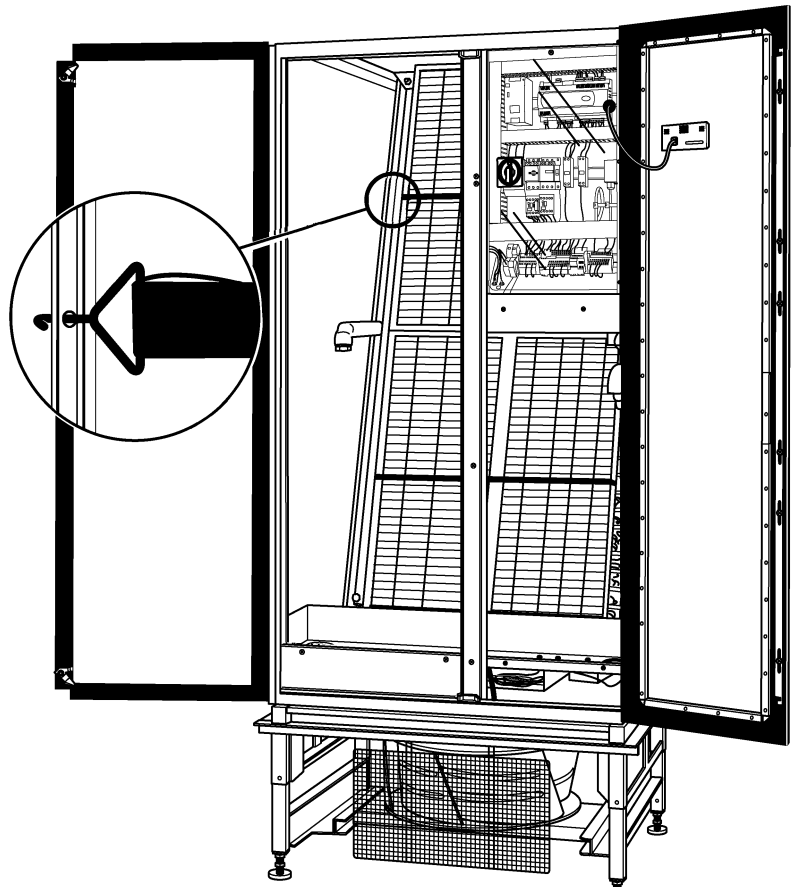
Filter attachment with rubber clamps (CW version in this example)
